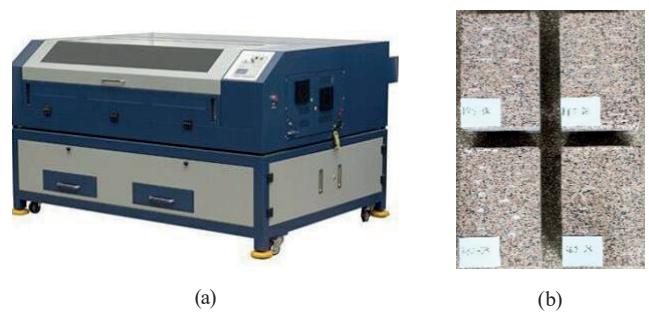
(a) High-speed precision laser cutting machine and (b) rock samples
